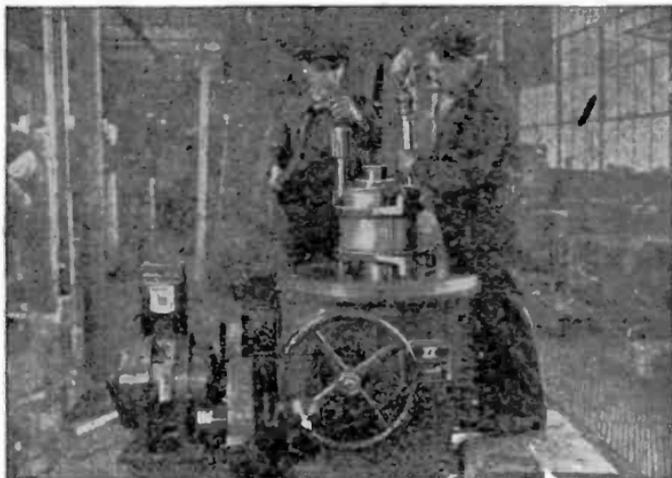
,526.—*Reliance induction motor construction 1.* Completing the assembly of field punchings with steel end flanges by riveting. One end of rivet is heated electrically and then upset to obtain tight and rigid cores.
